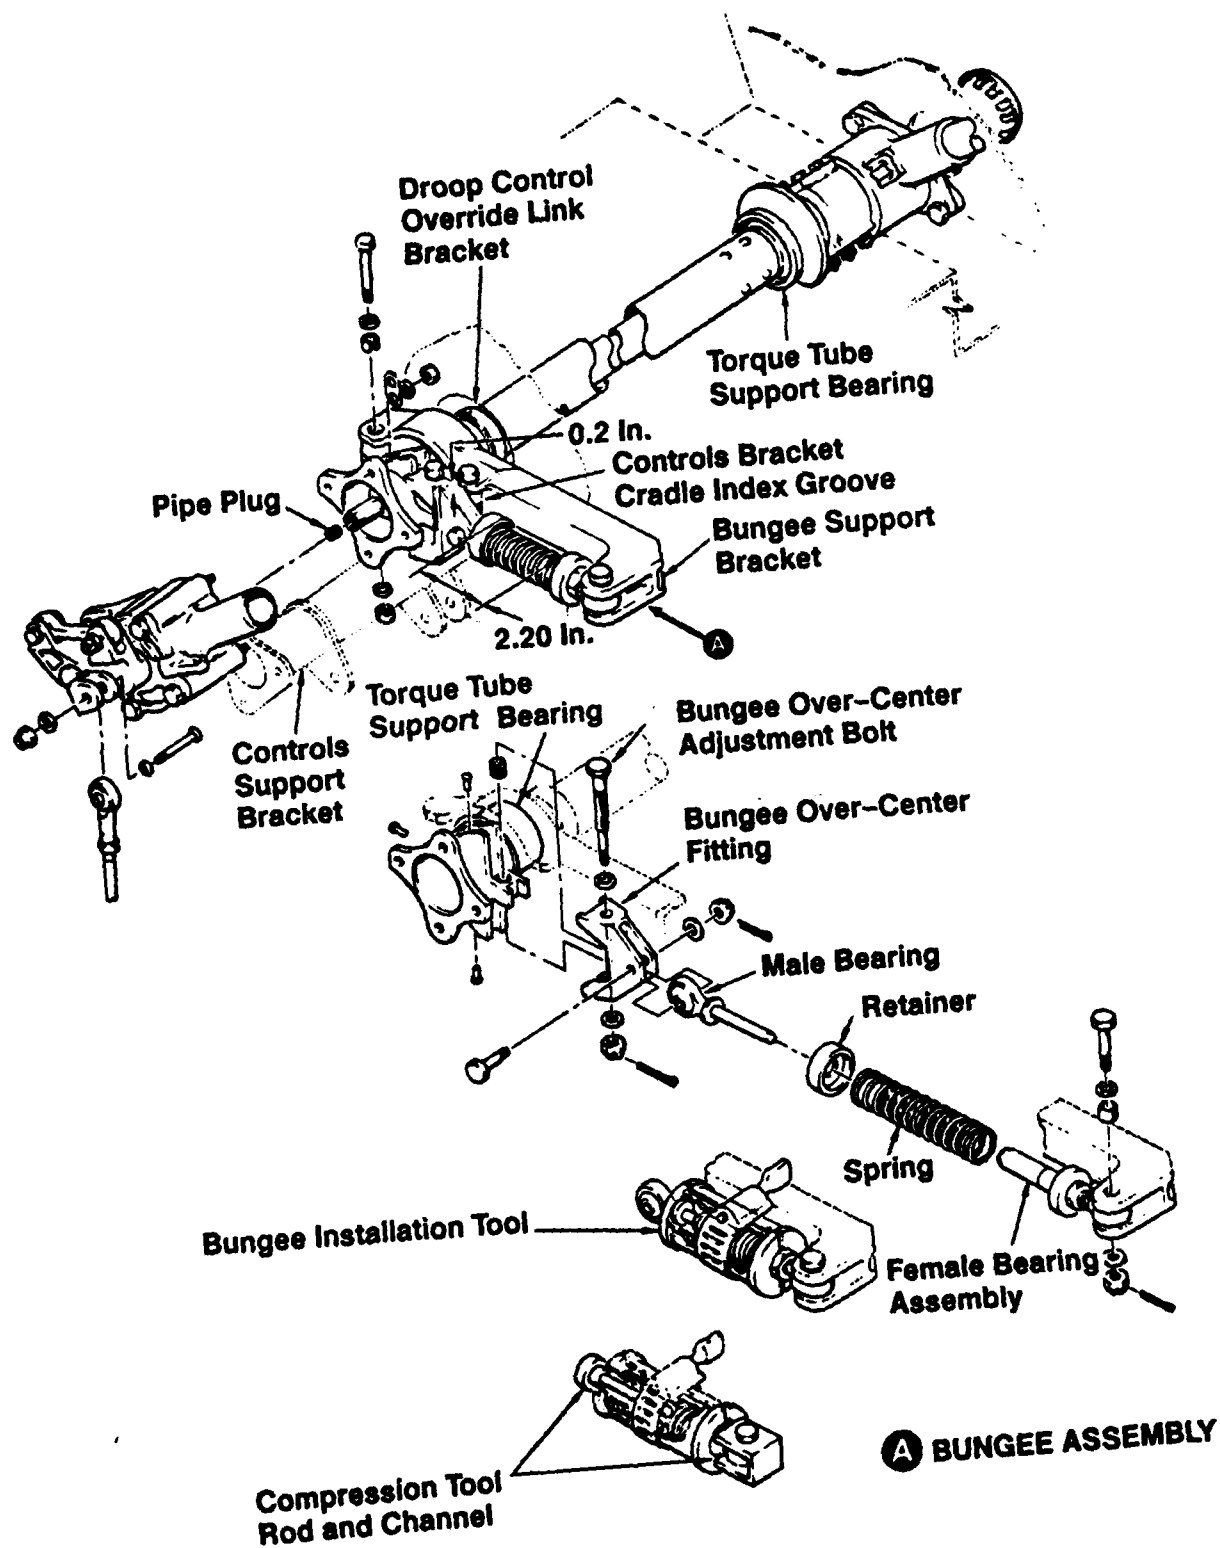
Collective Torque Tube, Gas Producer Torque Tube, Collective Bungee
